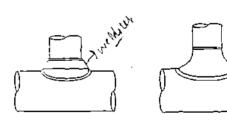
Weldolet Fig. 2.23: Sweepolet
